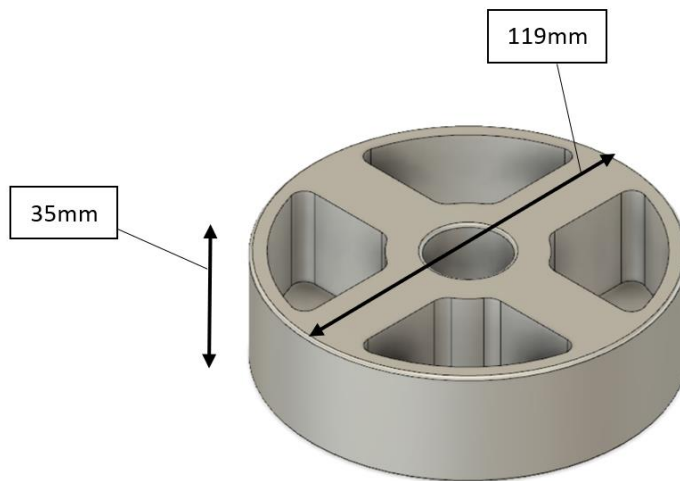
The 3D model for the engine block. The component itself is machined out of an aluminium block of metal using a CNC machine, having a 119mm (4.685 inches) diameter and standing at 35mm (1.378 inches) in height
